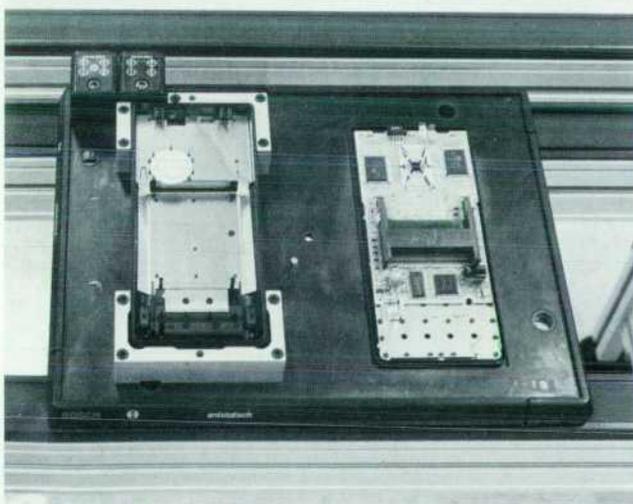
Assemblies are carried on pallets that ride on conveyor belts. The line has seven robot stations.
